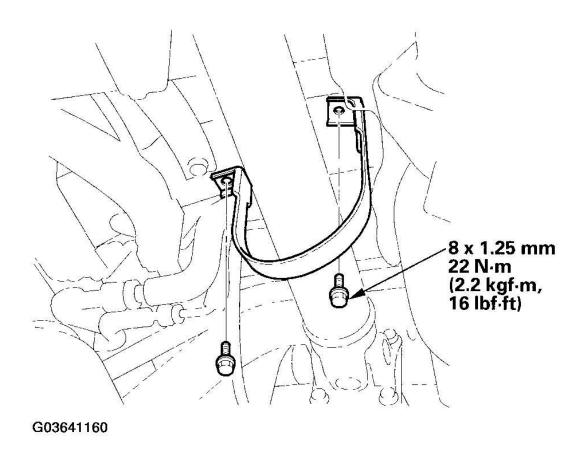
Installing Propeller Shaft Protector Courtesy of AMERICAN HONDA MOTOR CO., INC.
